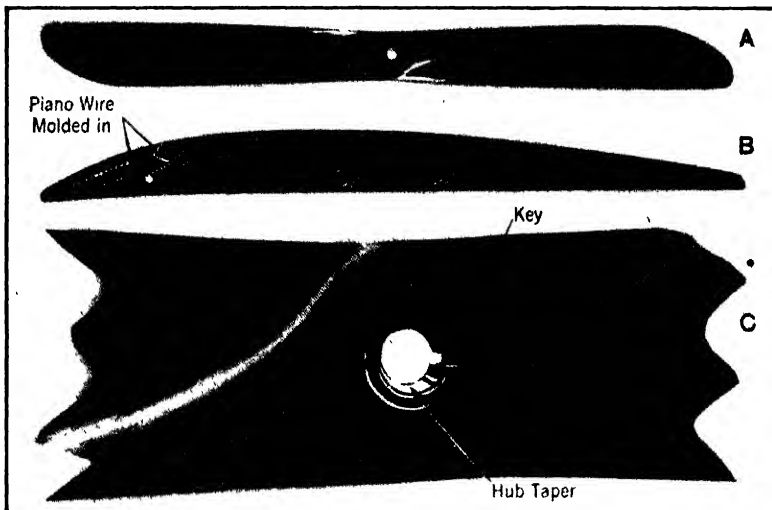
Bakelite Propeller Shown at A. B—Section of Blade Showing Bakelite Micarta Sheets of which it is Composed and Piano Wire Molded in to Strengthen Leading Edge. C—How Driving Keyway is cut Directly into the Propeller Hub which is Strong Enough to be Seated Directly on Taper Shaft.
